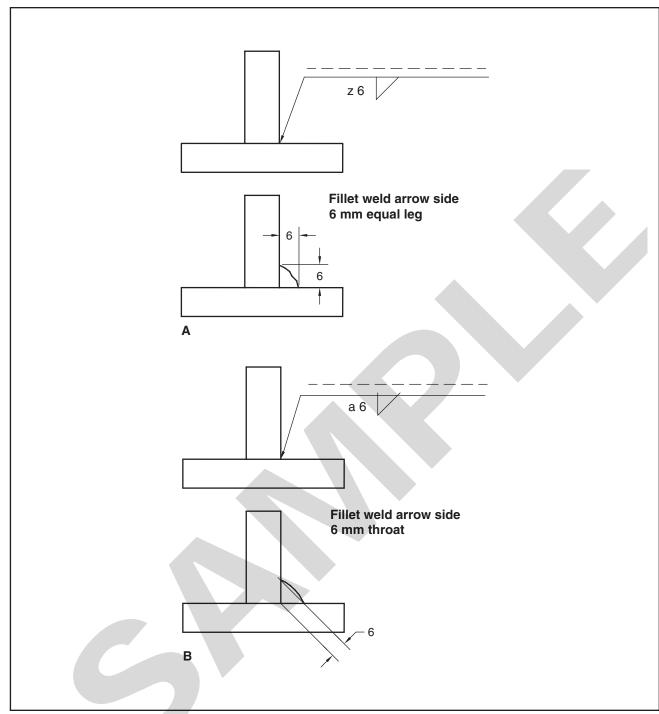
This AWS fillet weld symbol has a leg size designator.
